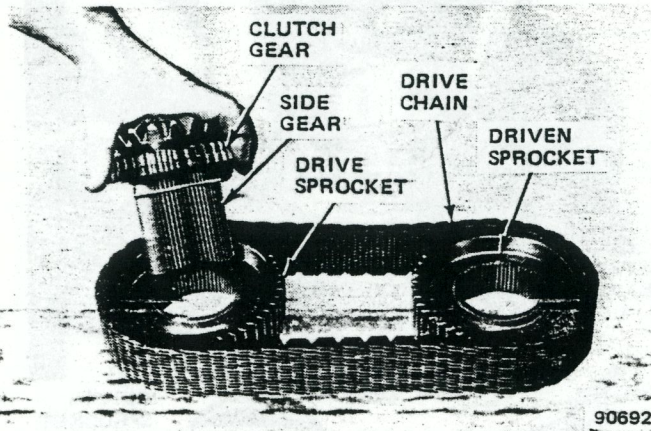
D-52 Side Gear, Clutch Gear, Sprockets and Chain Assembly
